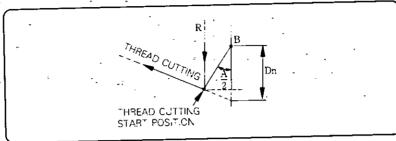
Start Position when Taper Thread Cutting is Commanded by A ≠ 0
